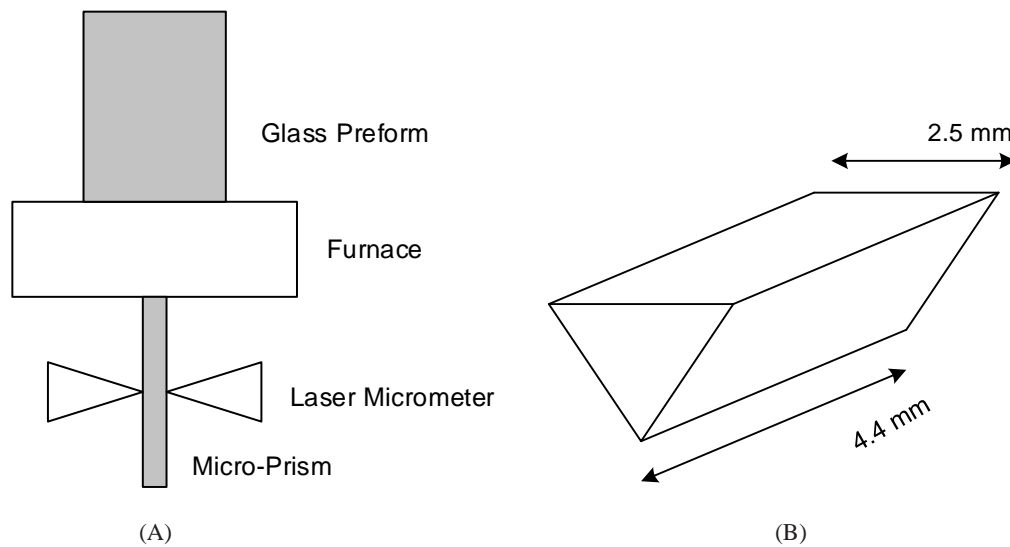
(A) Drawing process of micro-prism. (B) Geometry of fabricated micro-prism.
